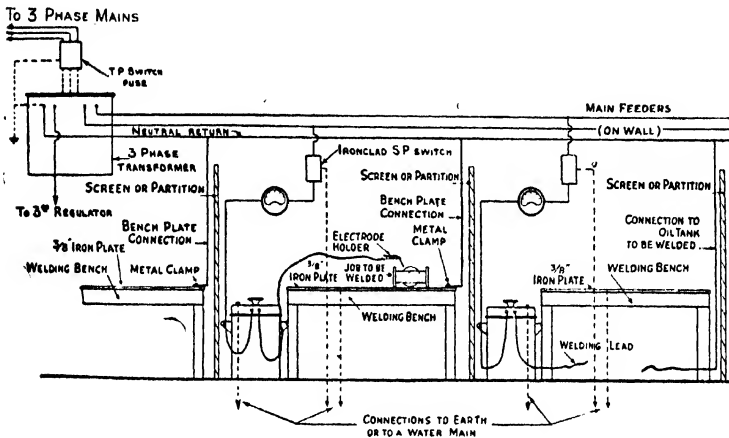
MULTIPLE-OPERATOR A.C. WELDING PLANT
